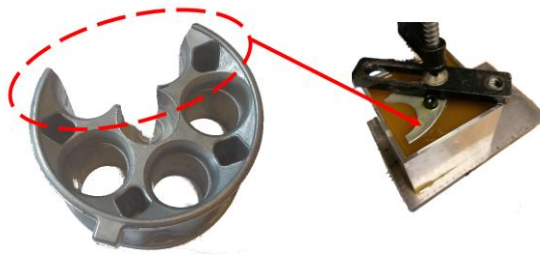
The tested part and the cut-out part embedded in resin for slicing by sequential cutting for the examination of shrink cavities.
